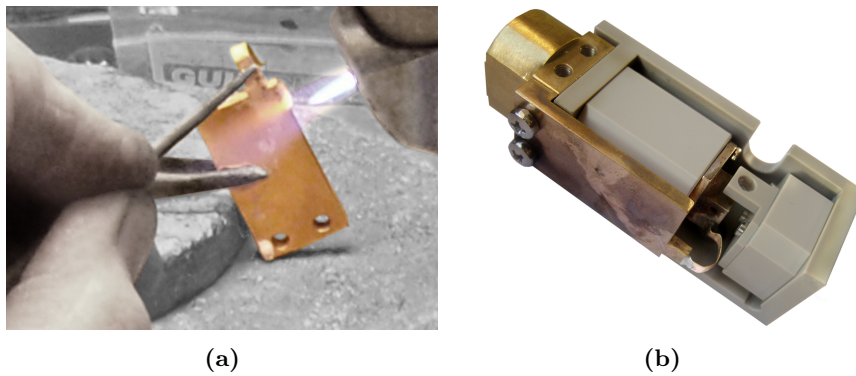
(a) The process of silver soldering. (b) The mounted holder with gold-plated and silver soldered parts. Nanopositioners are here replaced with mock-cubes made of PEEK (plastic).
